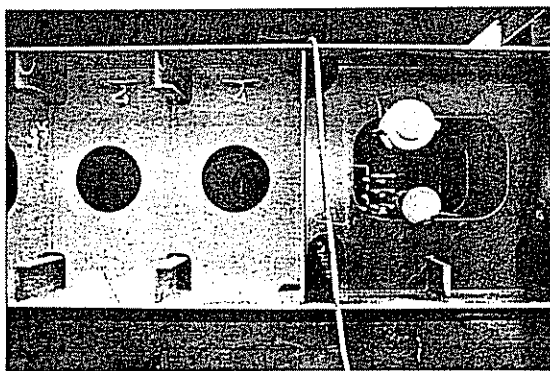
On-block outfitting in a pipe tunnel under a cargo hold
